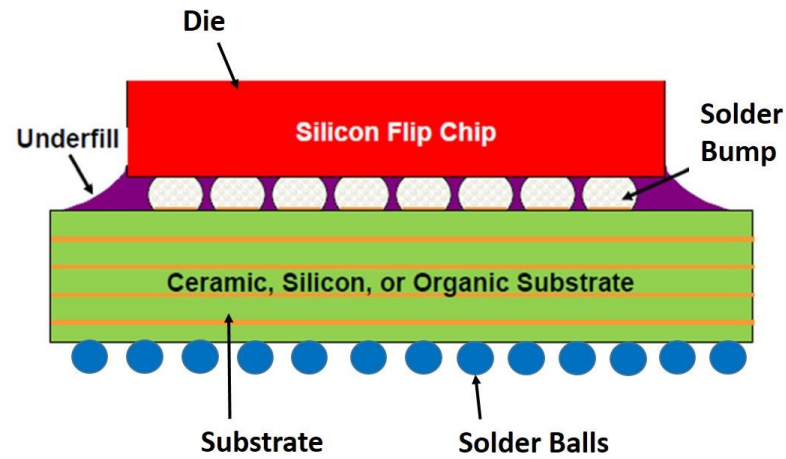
Cross-sectional View of Flip Chip Package (Lau, 2016)
